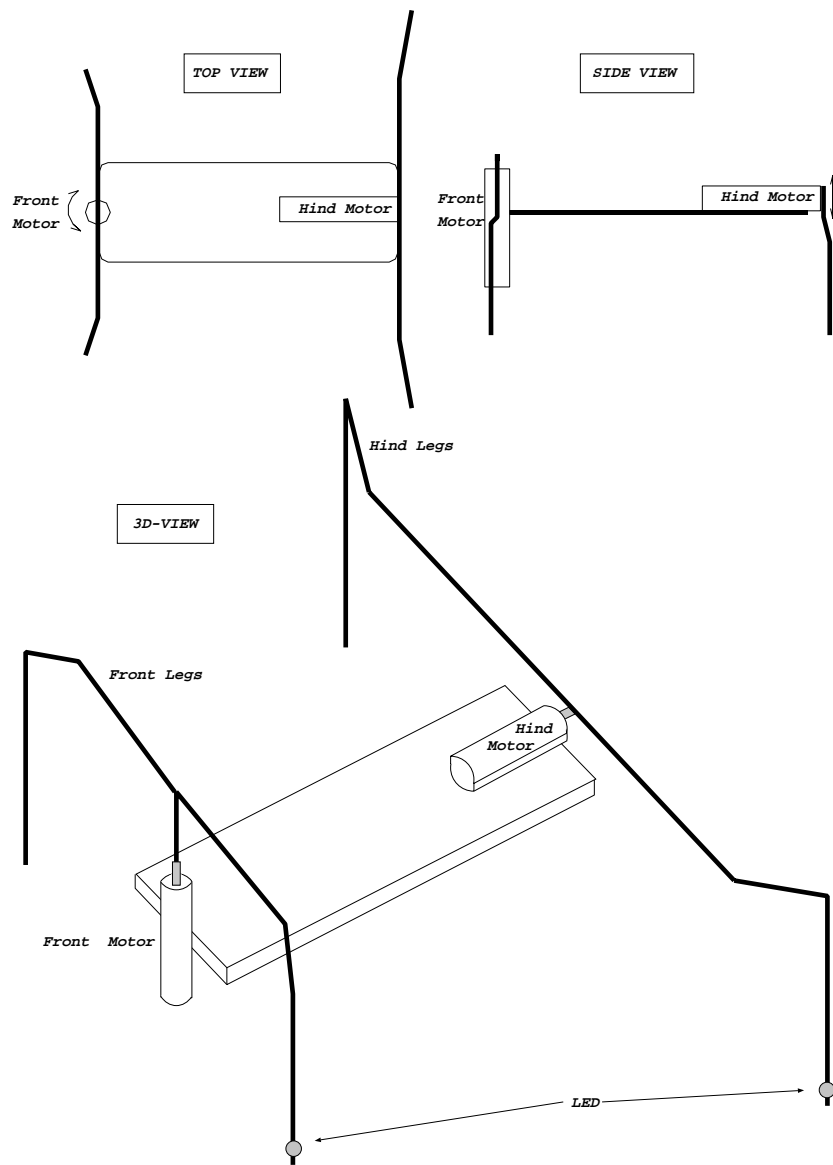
Schematic of the robot. The upper drawings show a top and a side view, the lower one is a three dimensional sketch of the machine.
